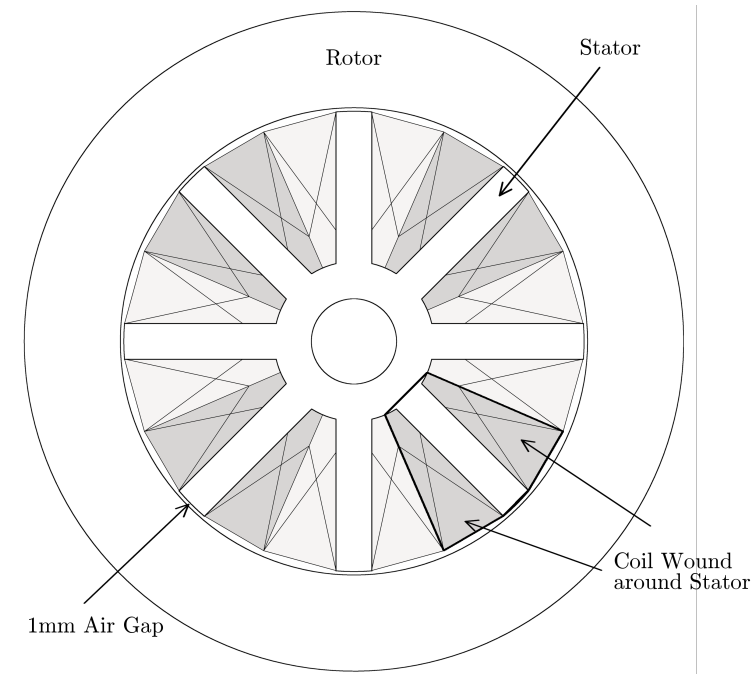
Cross-Sectional View of UIFESS Stabilization Bearing Identifying Rotor, Stator, Air Gap, and Coils
